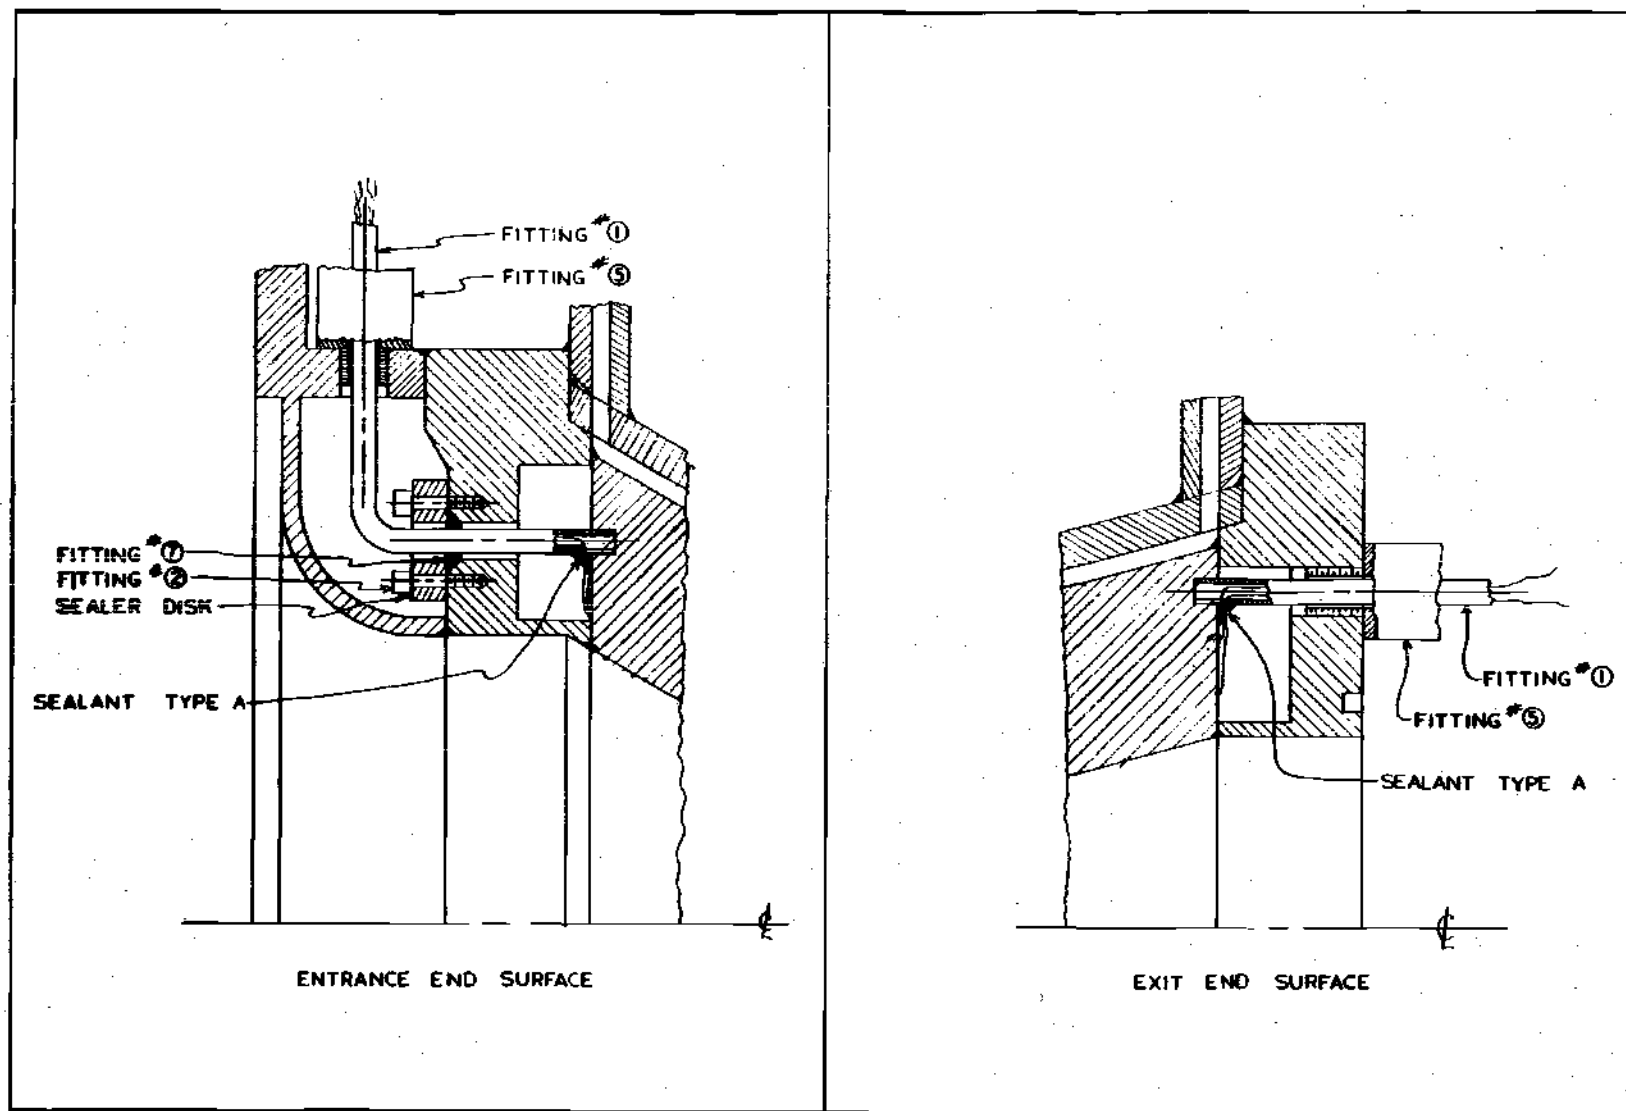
THERMOCOUPLE MOUNTING DETAILS
